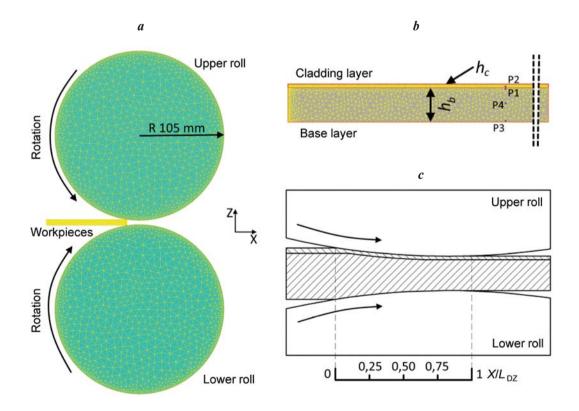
The geometry of the roll unit (a), workpieces (b), and deformation center (c)
